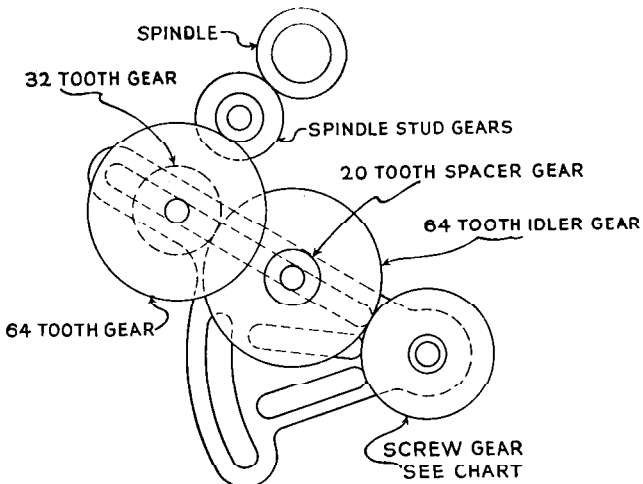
Gear set-up for 36 through 64 threads per inch (see page 10).
